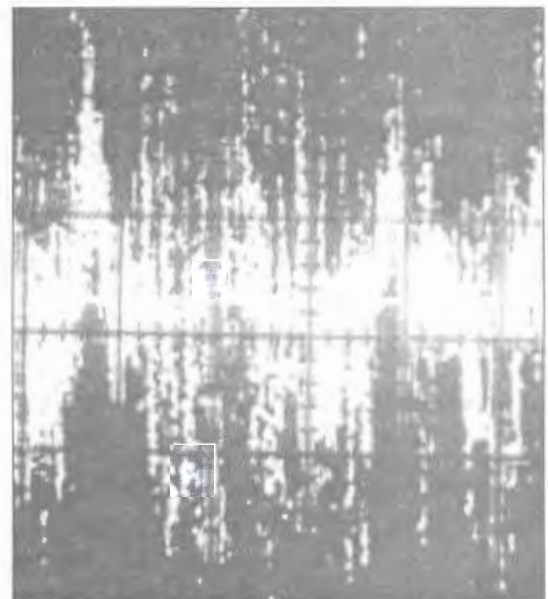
Oscilloscope picture of oscillations of the weld pool in pulsed arc welding
